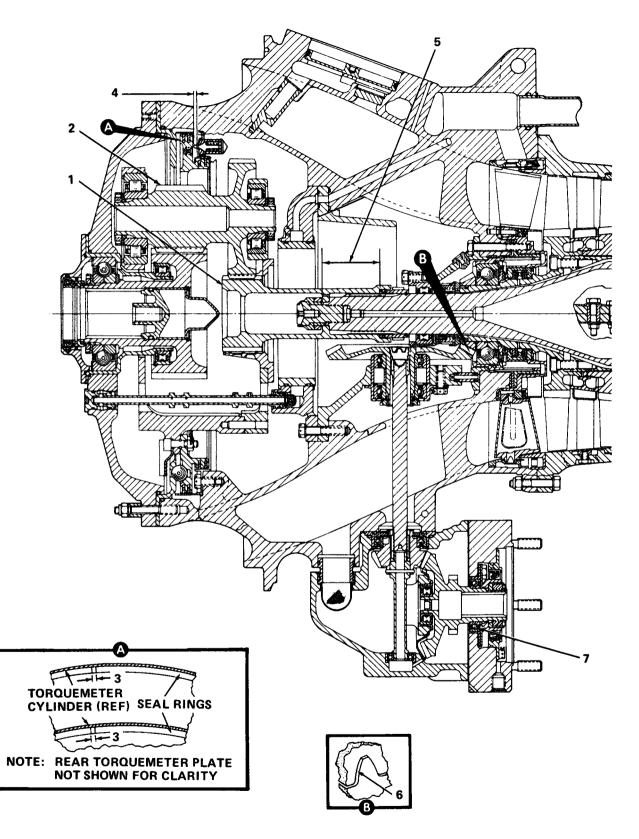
Fits, Clearances and Backlashes (T53-L-13B/703 Engines) (Sheet 1 of 4)
